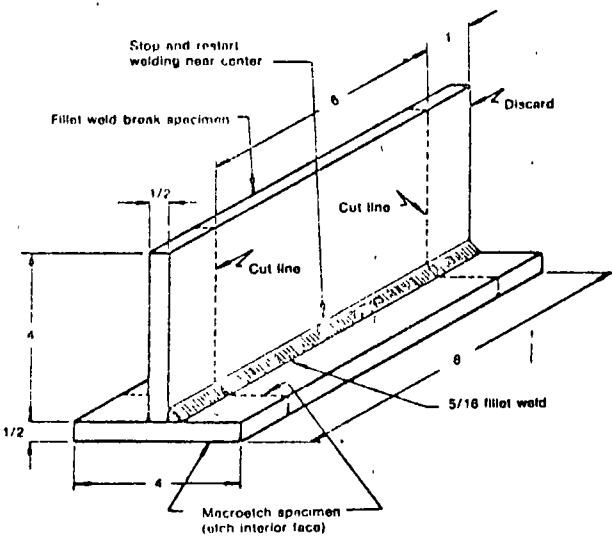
Fillet-weld-break and macroetch test plate—welder qualification—option 1.
